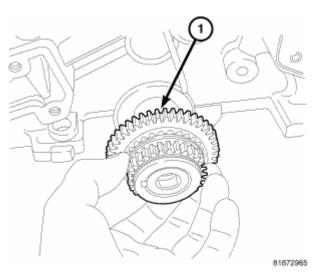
Crankshaft Sprocket Courtesy of CHRYSLER LLC
